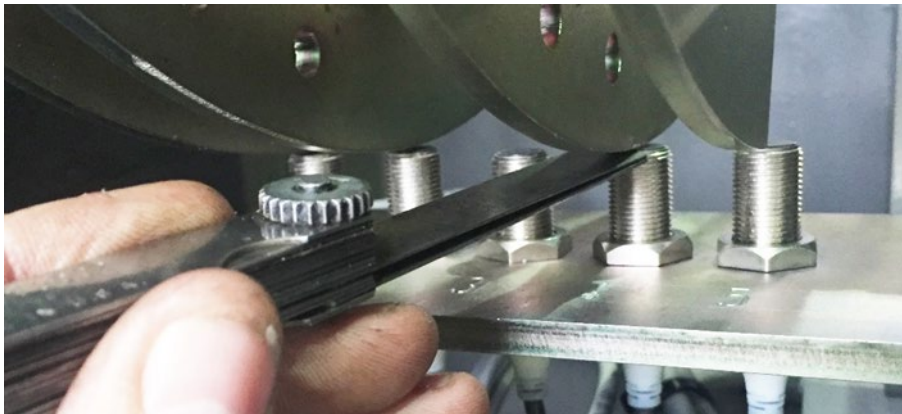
Position of gauges with the 1.5 mm gauge (Inserted)
